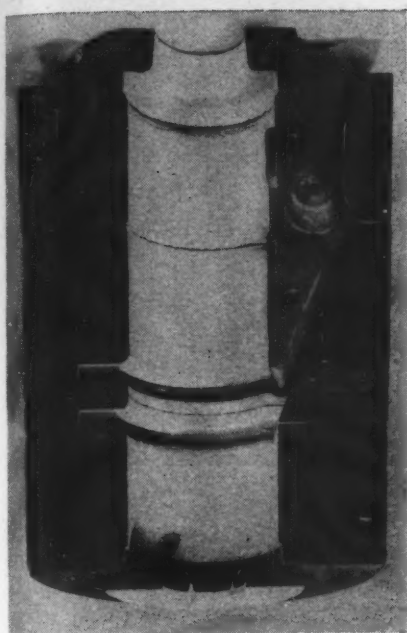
Cross-section of dry sand mold for hinge pivot.
